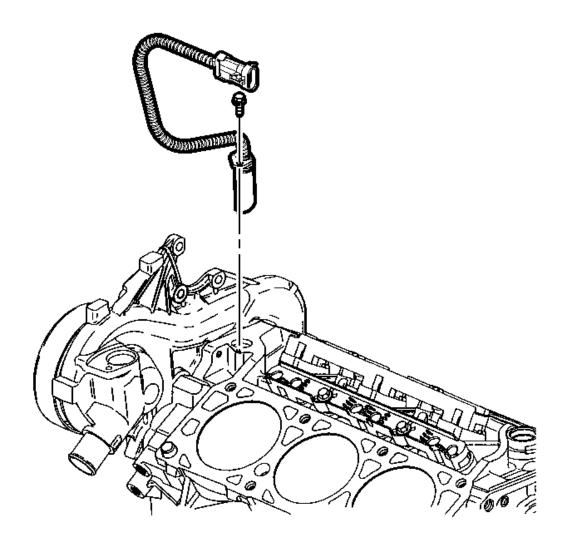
Installing Camshaft Position Sensor Courtesy of GENERAL MOTORS CORP.
